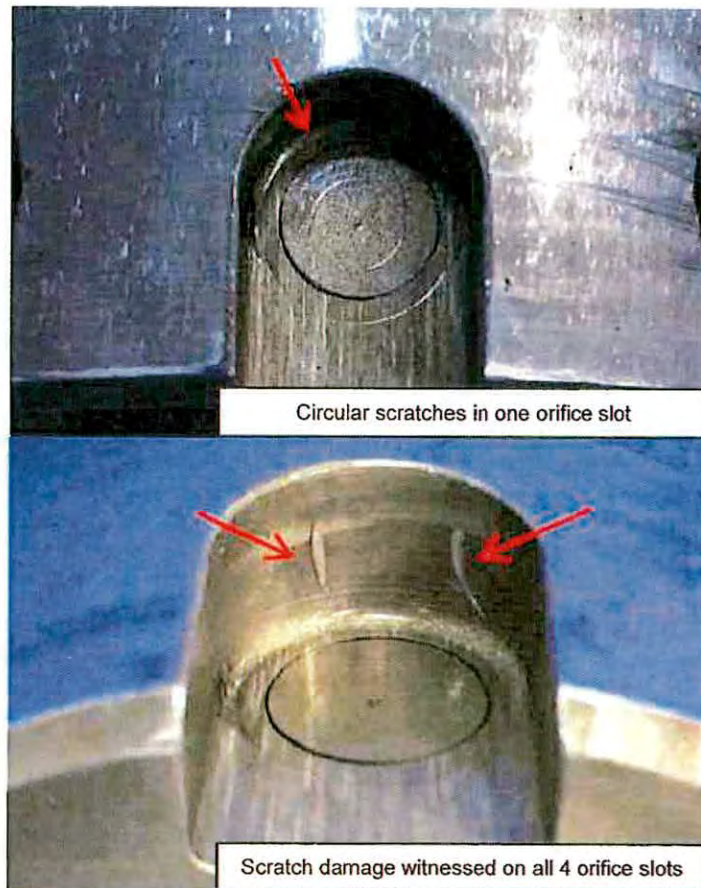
SCRATCH DAMAGE TO ORIFICE SLOTS OF VALVE HOUSING
